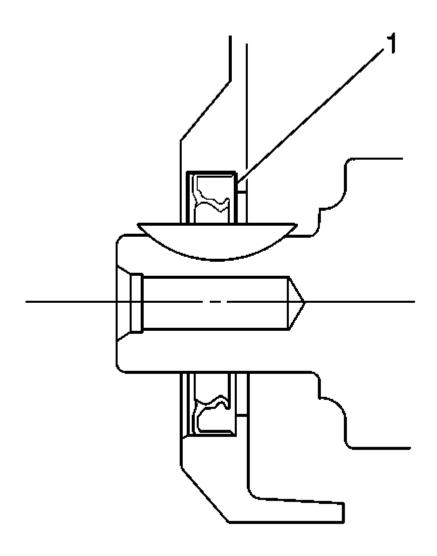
Proper Crankshaft Front Oil Seal Installation Courtesy of GENERAL MOTORS CORP.
